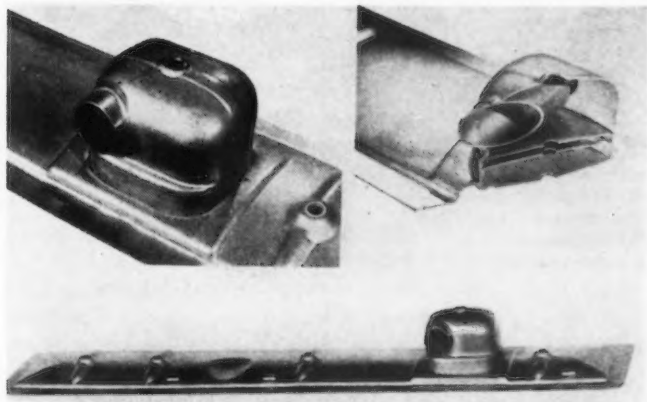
Push-rod cover for Buick automobile engine, copper brazed in roller-hearth conveyor-type furnace.
